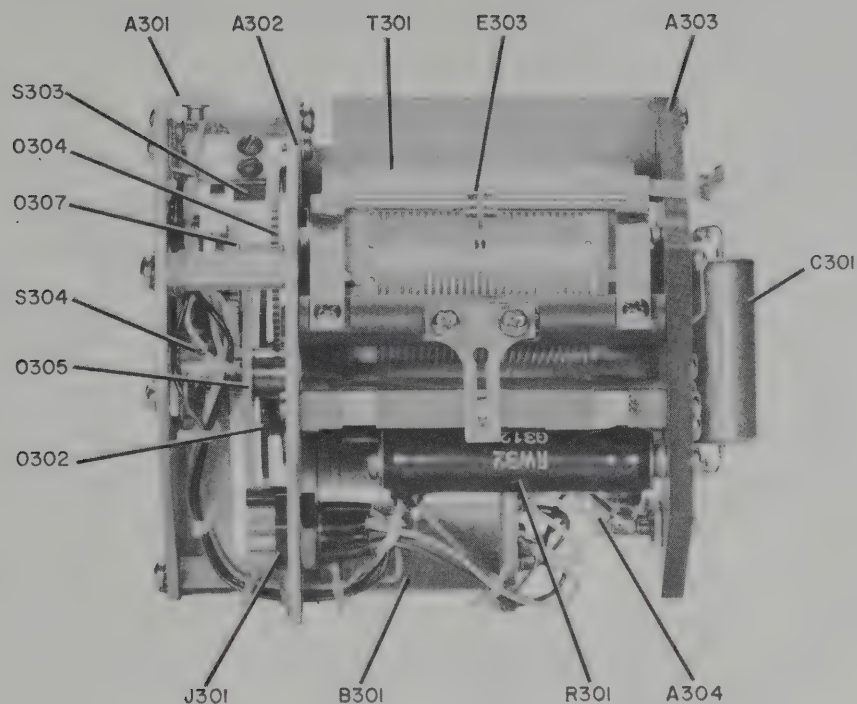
R-F Autotransformer Subassembly, Right Side View
